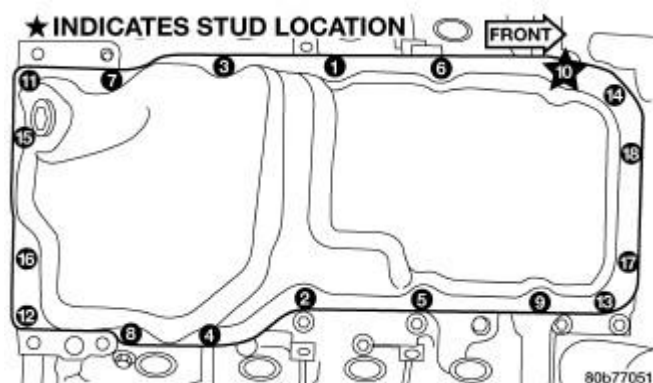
Oil Pan Mounting Bolts and Oil Pan
